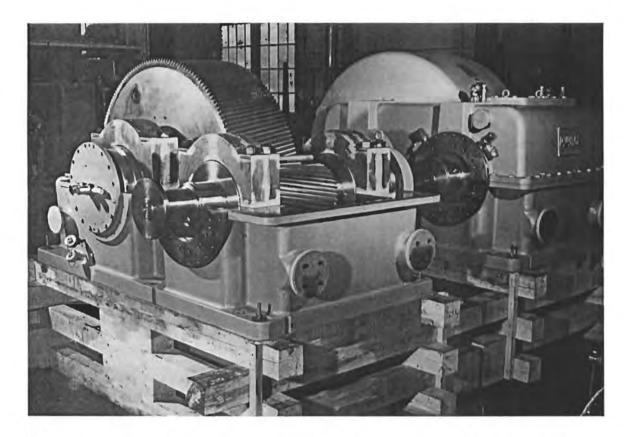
Speed increasing gearbox between synchronous motor and compressor. 31500 hp, 1200/5830 rpm.
